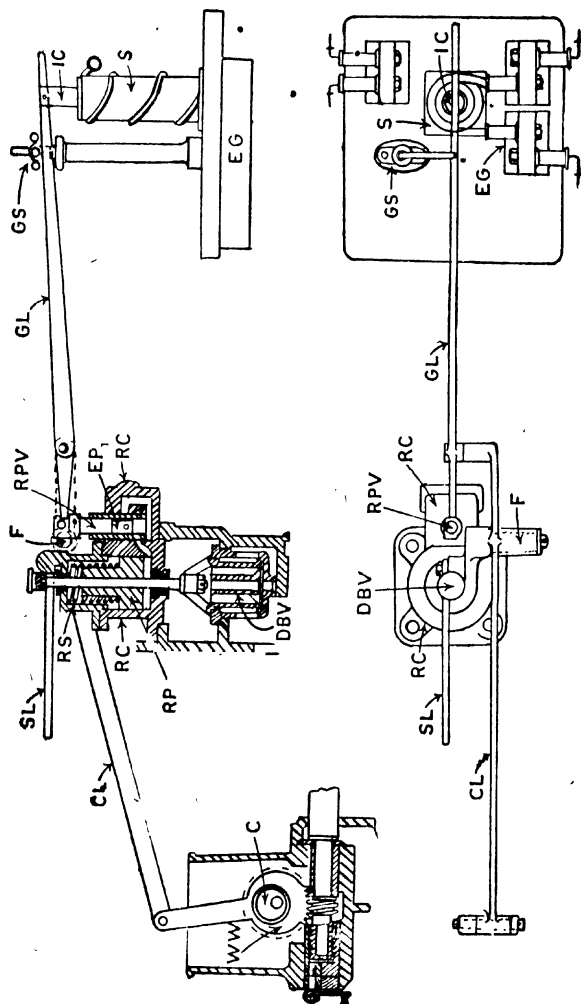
SECTIONAL ELEVATION AND PLAN OF ELECTRICAL GOVERNOR FOR PARSONS' TURBINE.
